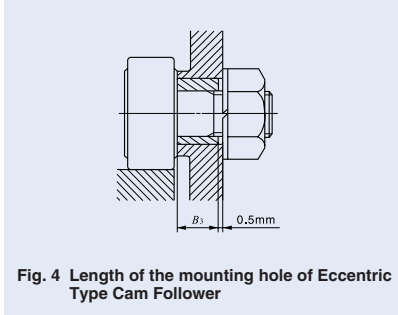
Length of the mounting hole of Eccentric Type Cam Follower
